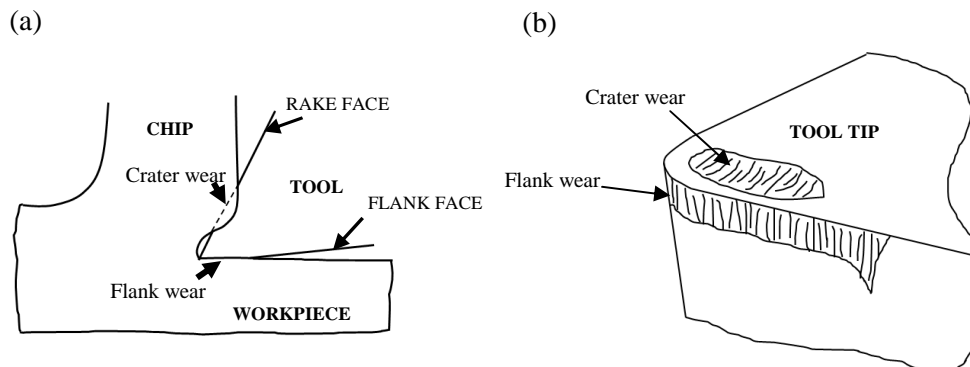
(a) Tool-workpiece interaction, and (b) location of crater wear and flank wear (Özel & Davim, 2009)
